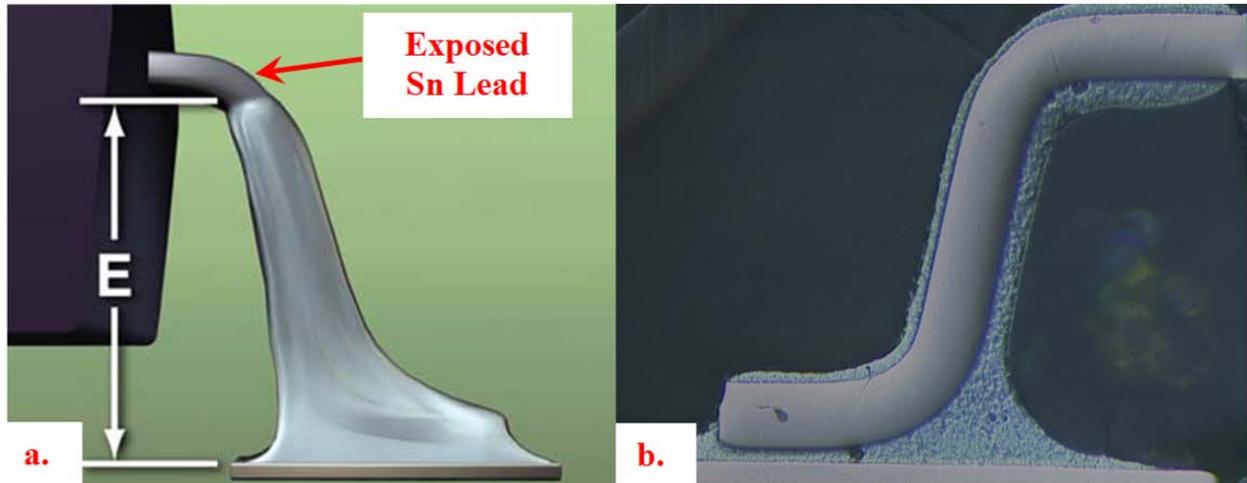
(a) Schematic for a typical solder joint of a leaded component using SnPb solder⁷, (b) cross section showing solder joint formed with Pb-free solder
